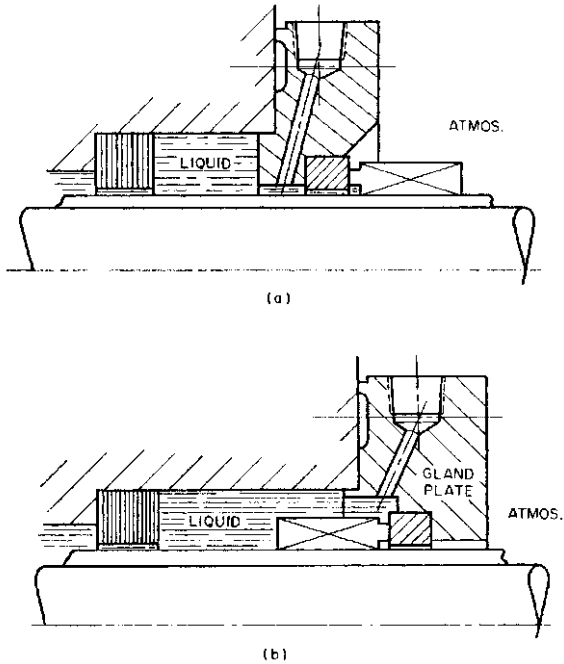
Single seal installations: a) outside mounted, b) inside mounted
